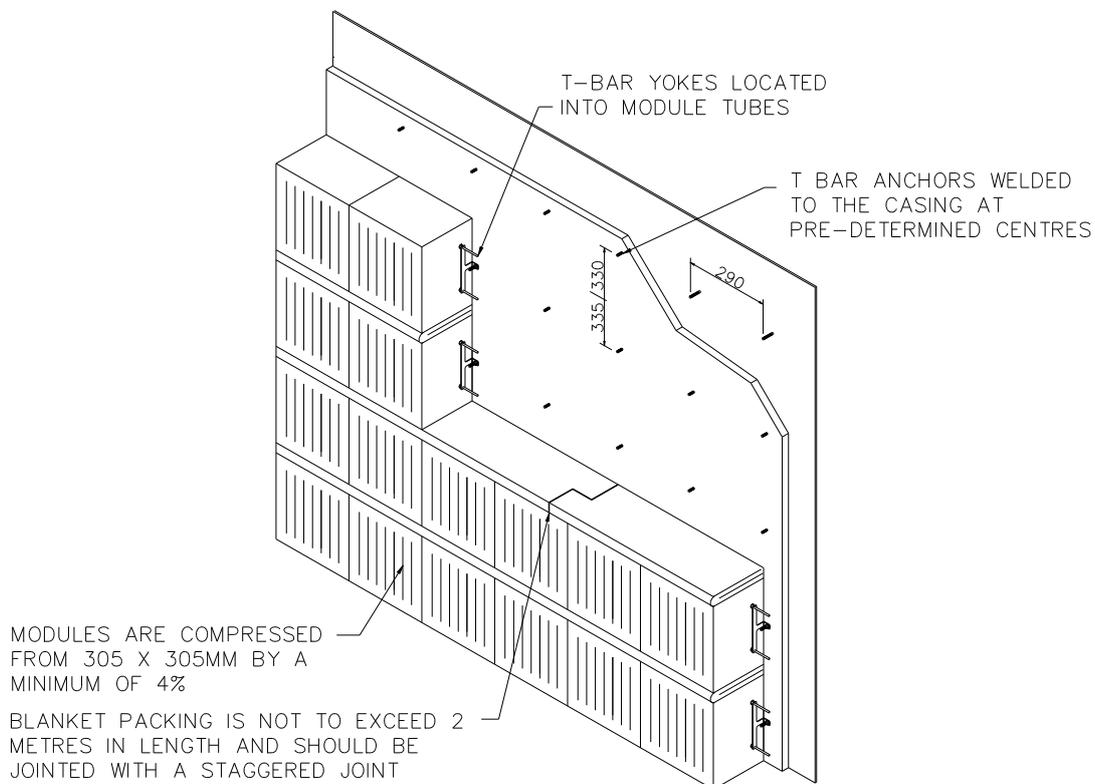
Typical Z-Blok 3 Module Lining and Anchor Layout
